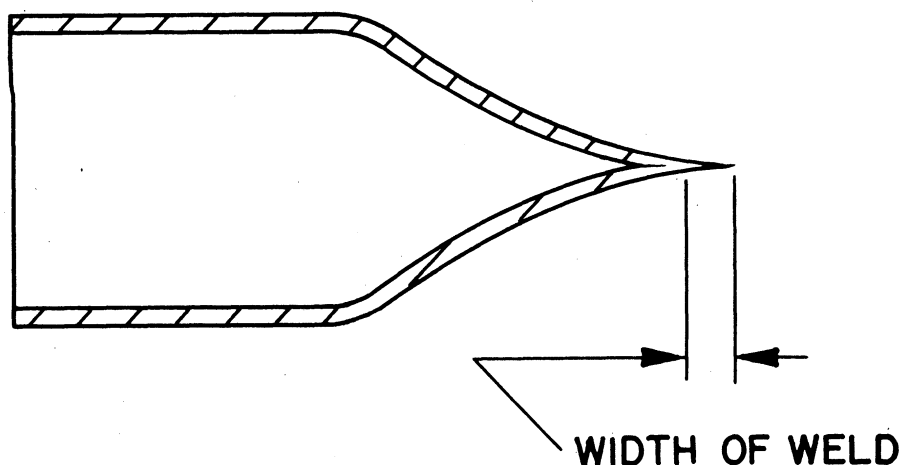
Schematic Cross Section of Cold Weld.
